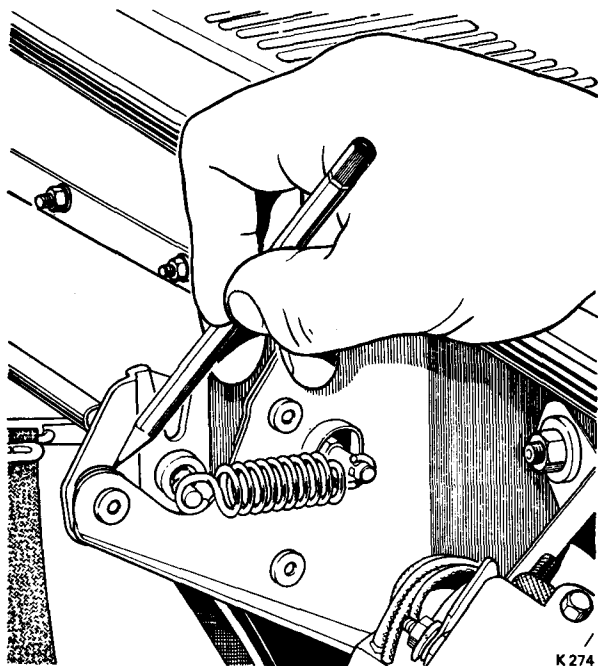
MARKING THE BONNET CATCH MECHANISM TO FACILITATE ASSEMBLY
